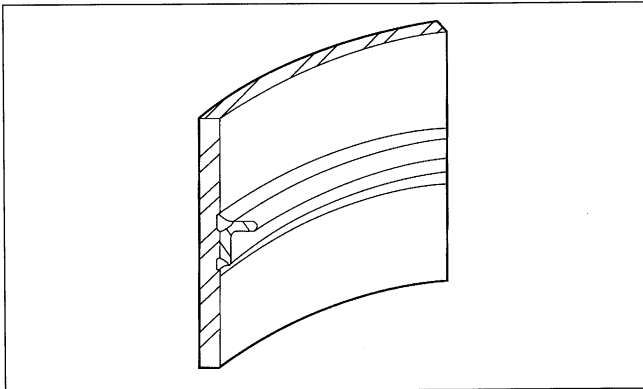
Stress corrosion cracking (SCC) of tubing.
